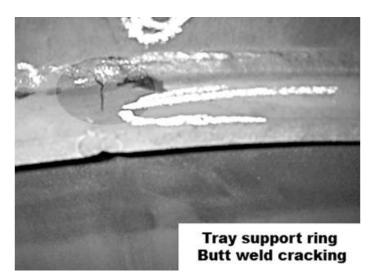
Tray Support Ring Butt Weld Cracking
